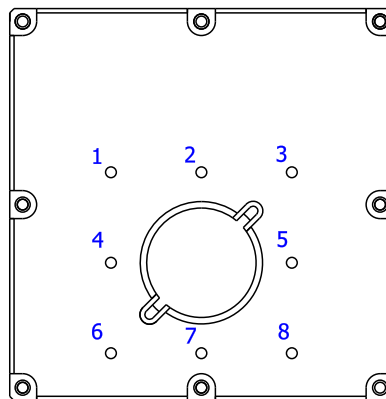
MDM96 front panel sketch showing eight holes with M3x0.5 thread located at 21mm grid. The holes are not intended (and not recommended) to be used for mounting. Three of the holes (## 2,6,8) have some internal parts attached to them (absolutely not suitable for mounting!). #4 and #5 are normally used for the lid. Usually unused holes are filled with plastic stubs.
